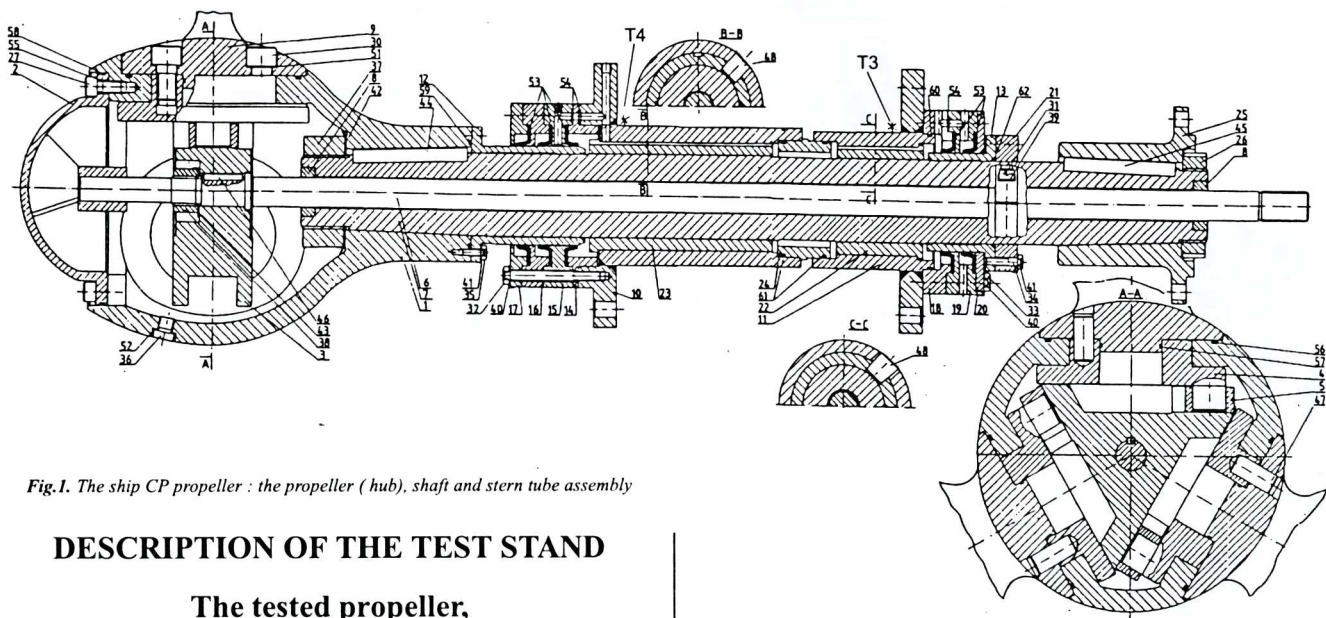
The ship CP propeller : the propeller (hub), shaft and stern tube assembly
